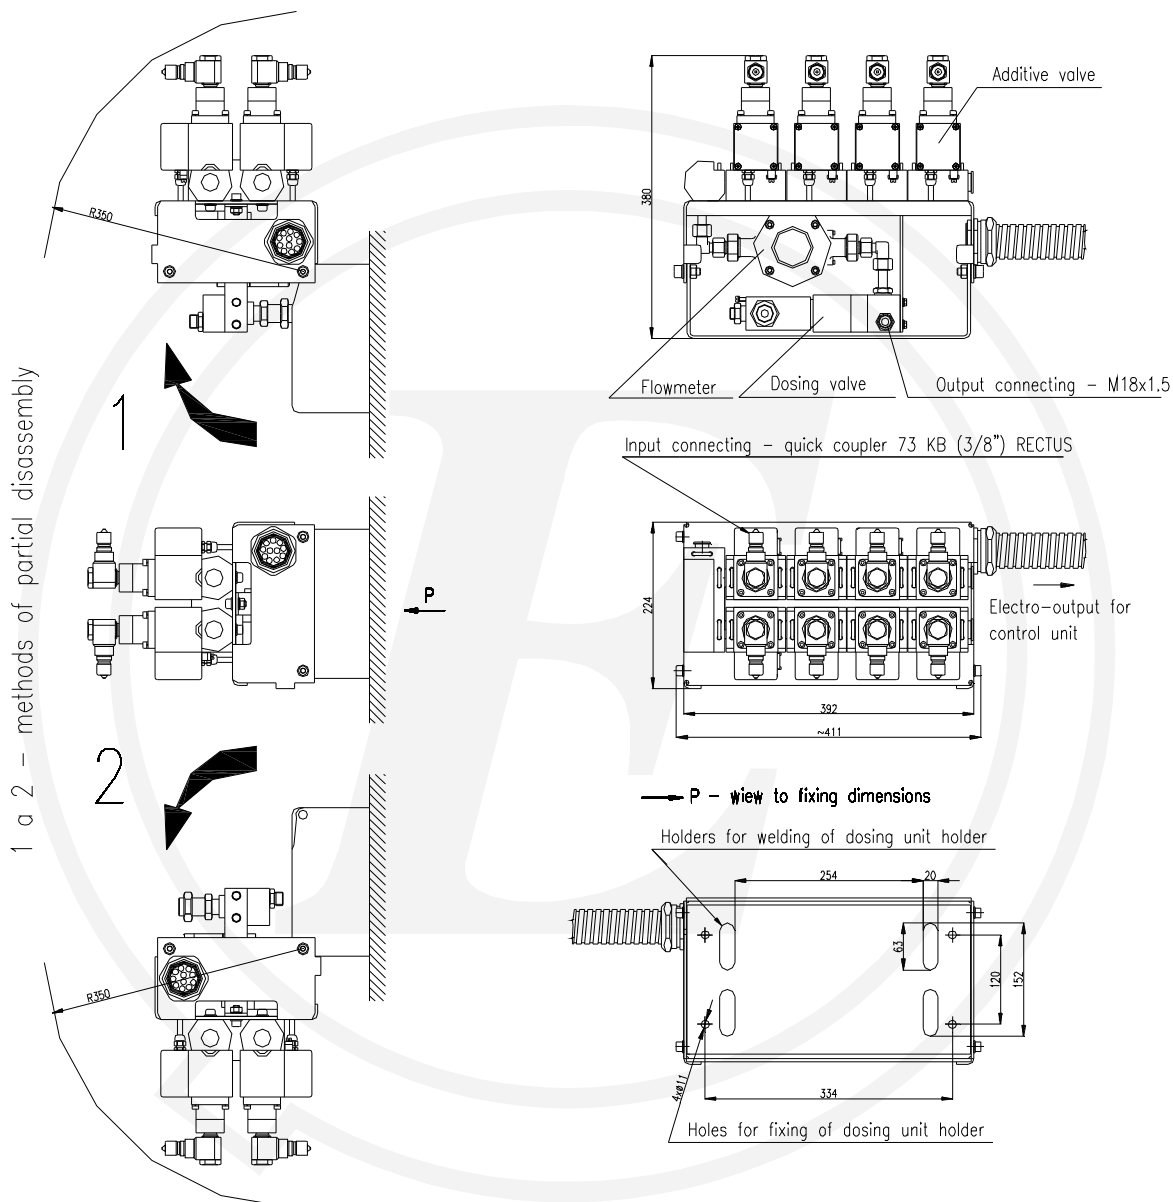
Dosing Unit 01900-11-008 with fixing dimensions
